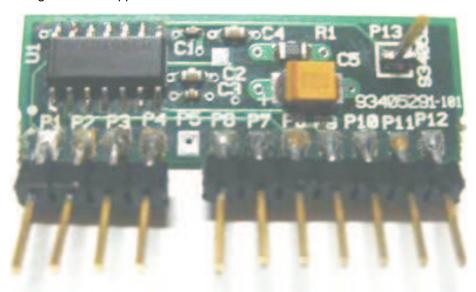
Example SN65HVD61-to-Hybrid Replacement Printed Circuit Board
